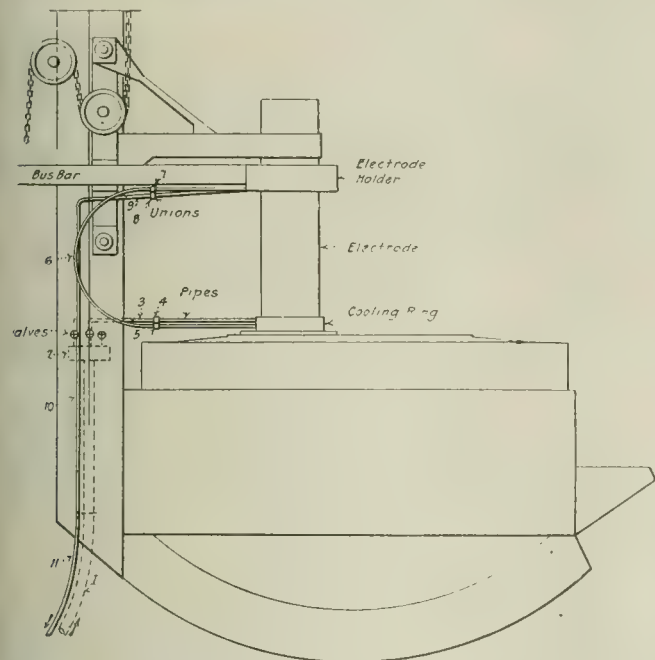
METHOD OF EQUIPPING ELECTRIC FURNACE ELECTRODES SO THEY MAY BE COOLED BY WATER
